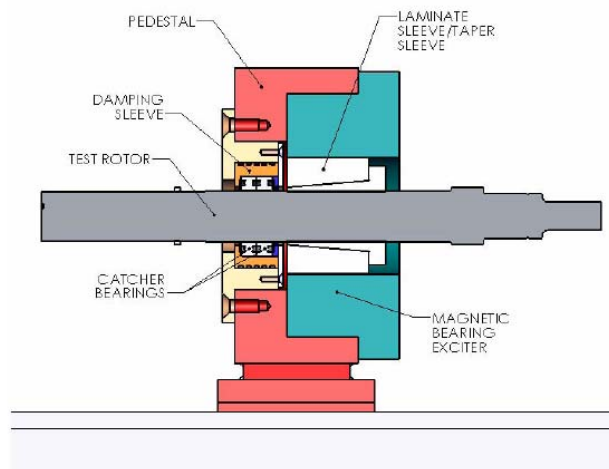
Cross-sectional view from Solidworks of the magnetic bearing support pedestal [5].
